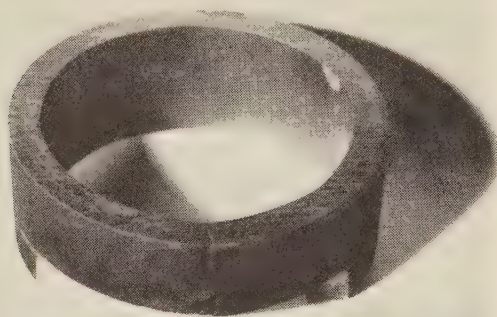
CRACK IN WALL OF AN 18-8 TUBE
